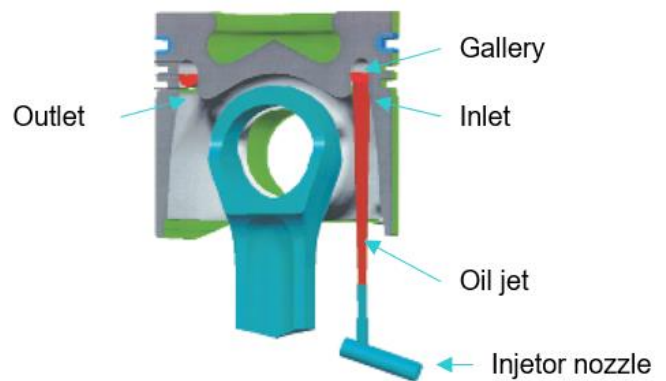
Scheme of the injector nozzle, oil jet and piston gallery.
